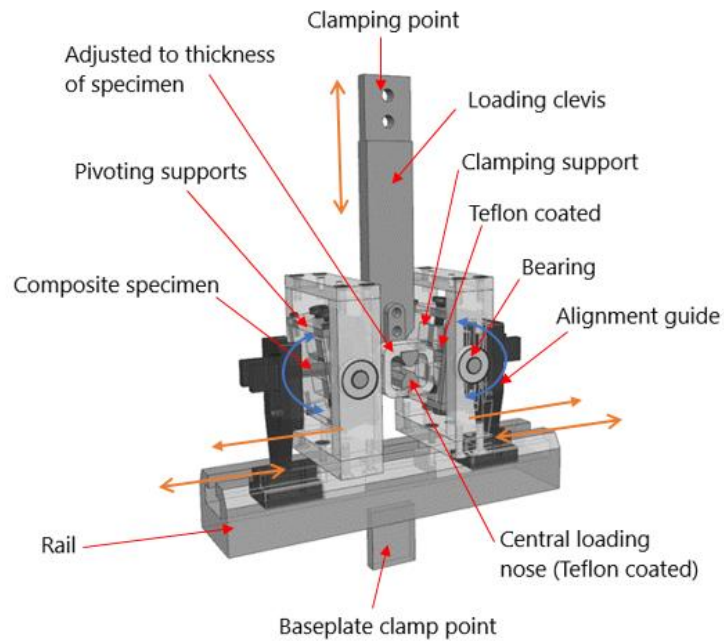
Custom reversible three point bend test fixture for Mode II testing
